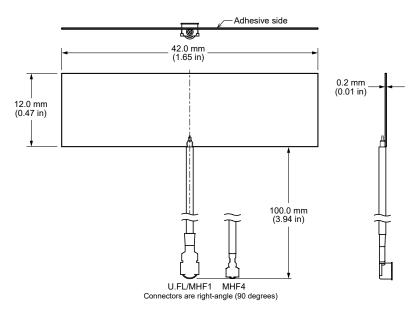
ANT-W63-FPC2-ccc-100 Dimensions
